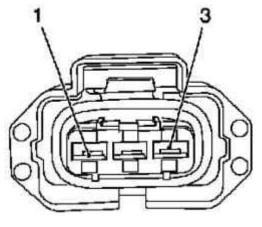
Wiring harness connector 3-pin (ZF)
